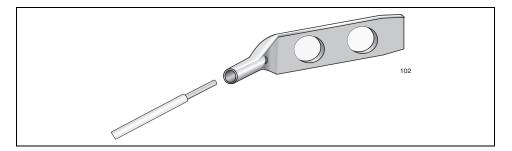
Attaching the Grounding Wire to the Grounding Lug
